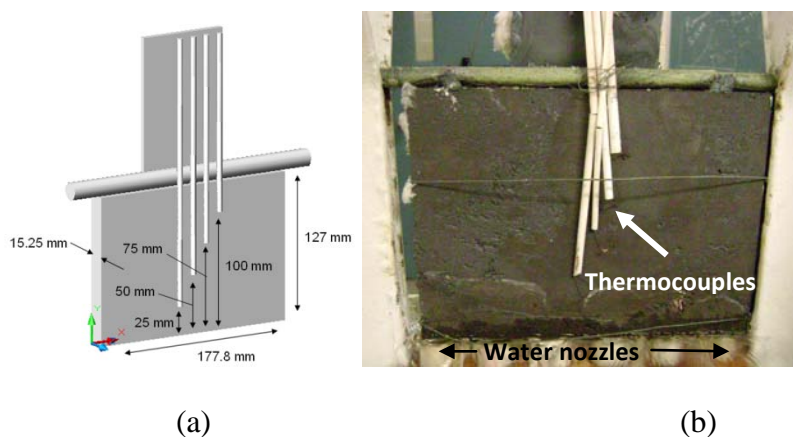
The quench plate schematic form (a) shows plate dimensions and thermocouple contact spacing distances every 25 mm. The actual plate form (b) is shown at the completion of testing in the quench fixture without its alumina fiber insulation wrap with the water pump engaged.
